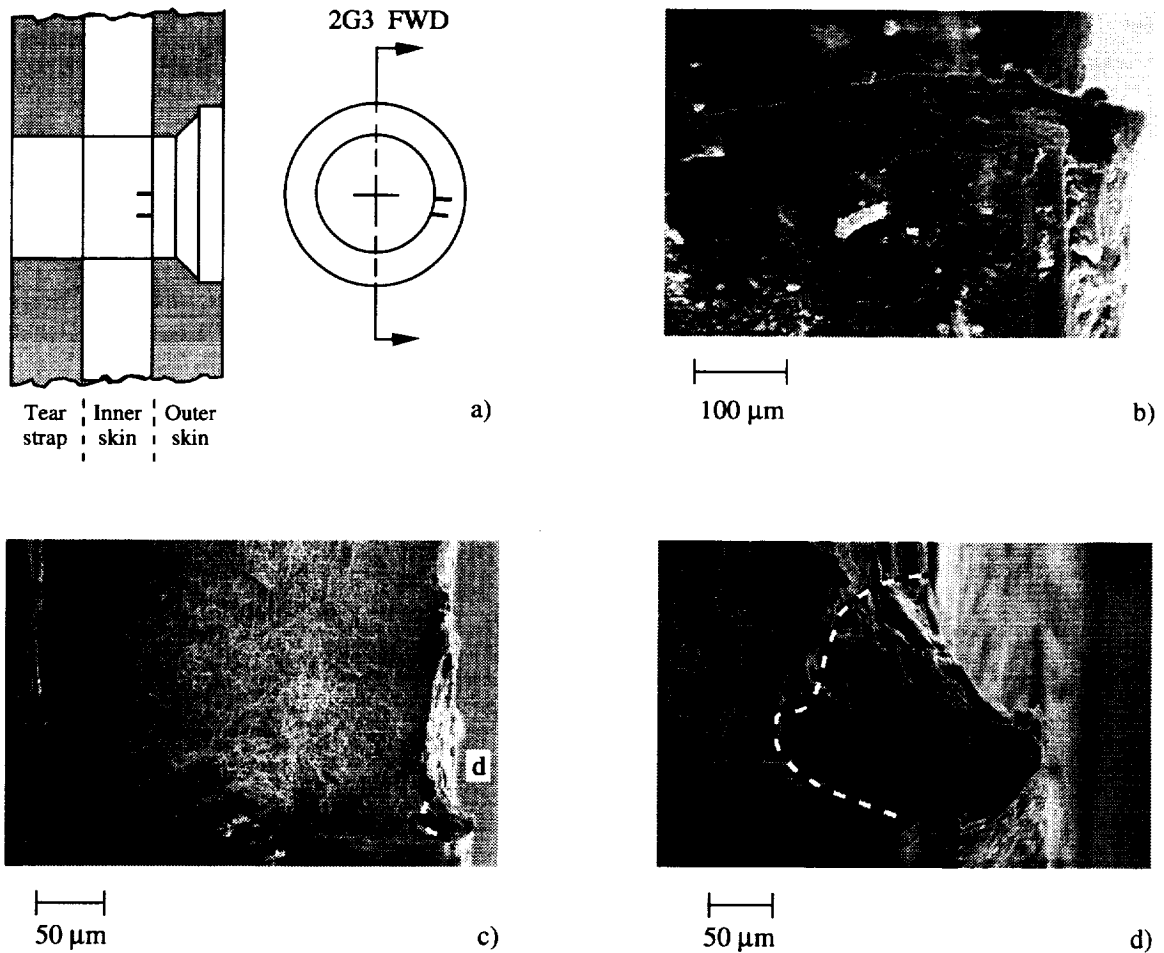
a) The schematic shows the rivet hole 2G3 configuration and the location of two inner skin fatigue cracks oriented in the forward direction and slightly below the 3 o'clock position. b) The SEM micrograph shows the surface of the rivet hole and a partially opened fatigue crack at the outboard corner after the initial destructive examination straining operation. A burr and disturbed metal are observed at the corner. c) The SEM micrograph shows the corner fatigue crack surface at the outboard corner of the rivet hole. The dashed line marks the fatigue crack front. d) The SEM micrograph shows the corner fatigue crack at high magnification (region "d" in Figure 7.35.c). The region of crack initiation is located near disturbed metal produced by a corner burr.
